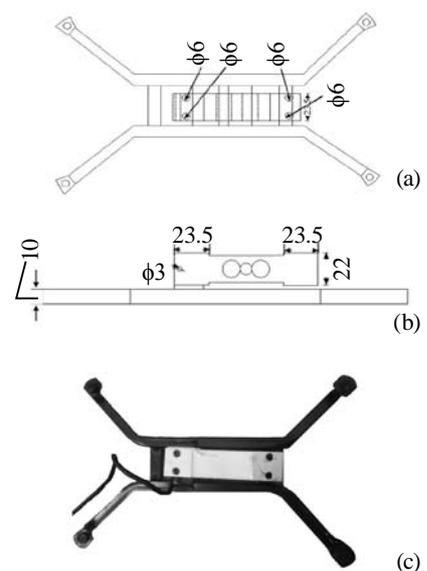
(a) Top view (b) Front view (c) Pictorial of a frame for load cell
